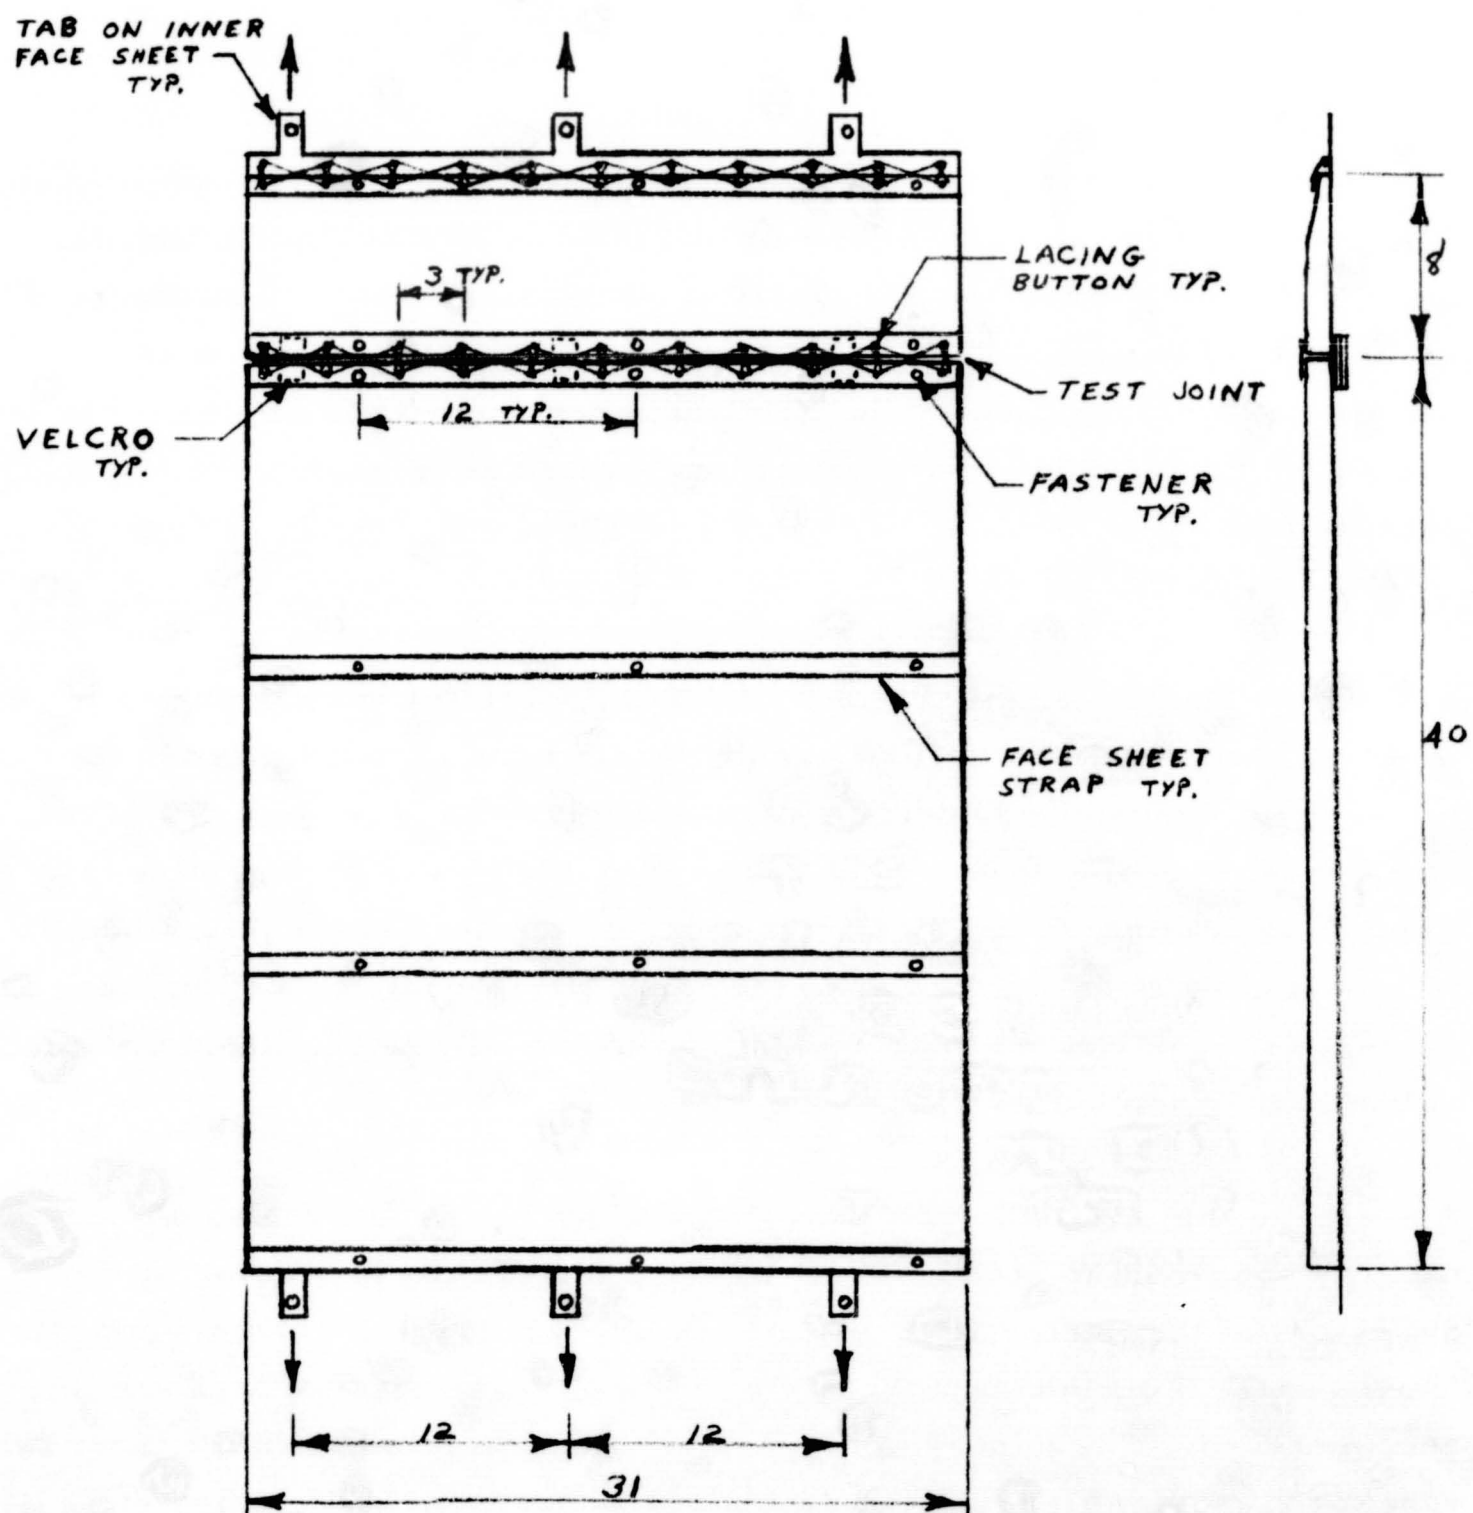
Loading of MLI Panel Joint—Test Setup
